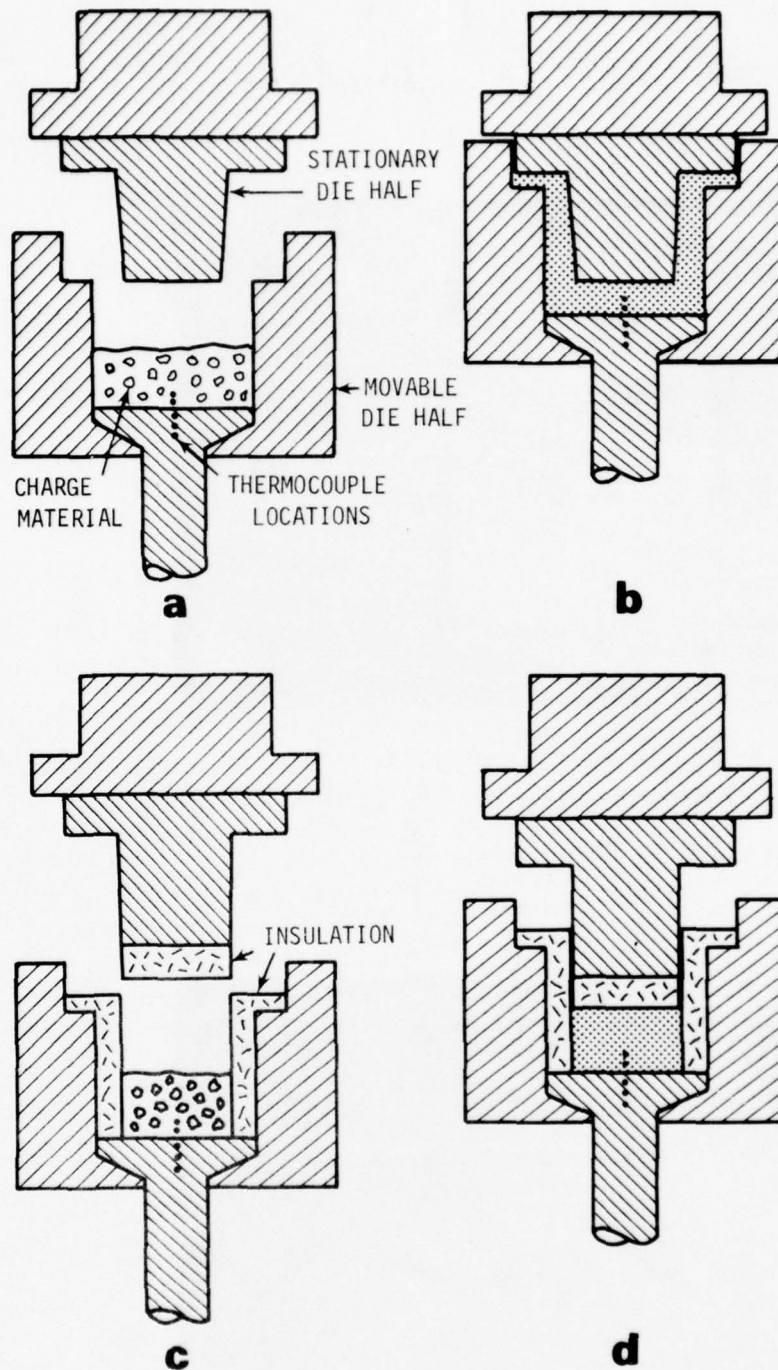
Schematic illustration of the dies used in the laboratory Thixoforging apparatuses; (a) and (b) represent the cup shaped part; (c) and (d) represent the cylindrical parts unidirectionally solidified by heat extraction from the bottom.
